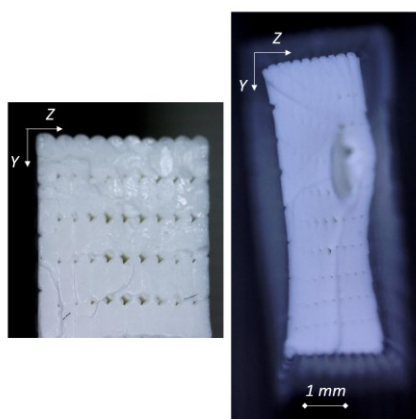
Left: Cross-section of a dog bone specimen. Right: Ductile fracture surface observed after tensile testing.
